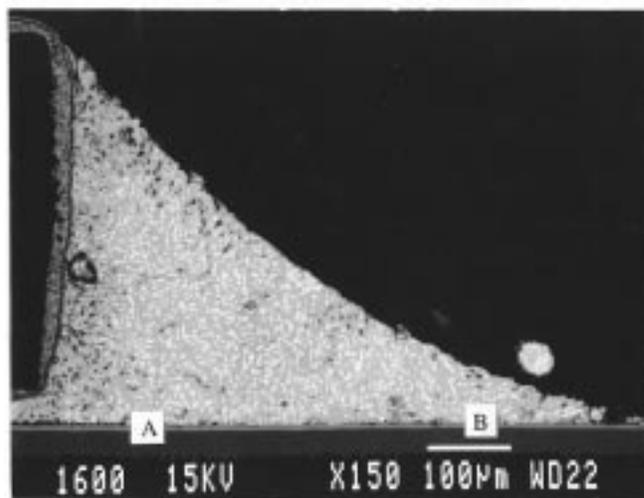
Cross sectional view of a 1206 surface mount solder joint.
